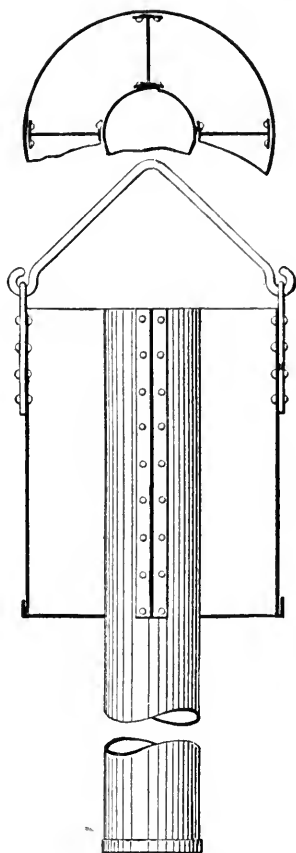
DRILL-STEEL BUCKET WITH LONG CENTRAL SECTION.
